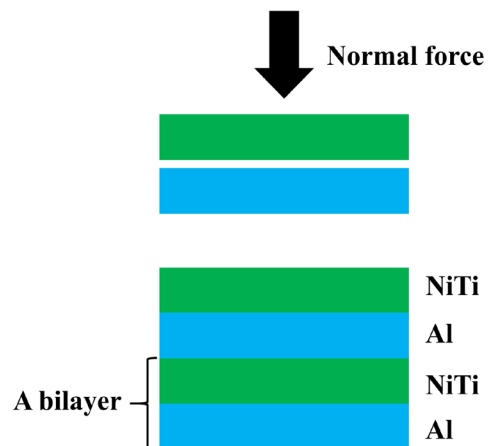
A schematic view of the UAM process employed for fabricating parts with successive layers of Al and Ti.
